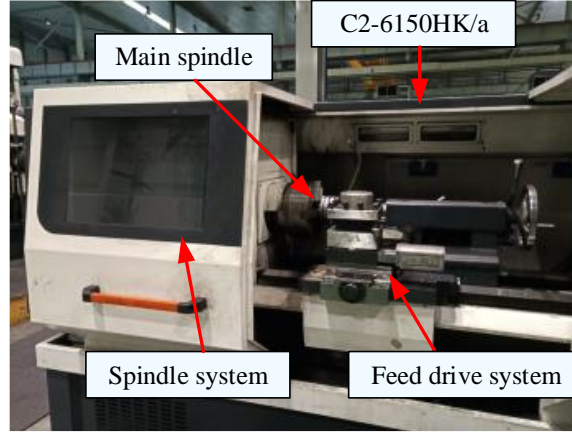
Mechanical system of C2-6150HK/a CNC lathe
